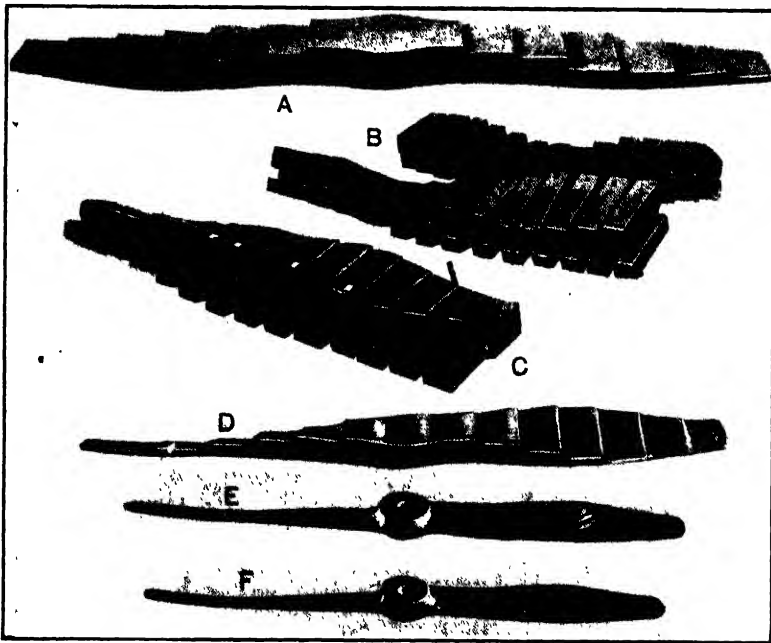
Outlining Steps in Constructing Wood Propellers by the De Grandeville System. Laminations before Bending Shown at A. B—Laminations Clamped for Bending. C—Bent Glued Blank with Clamps Partly Removed. D—Bent Blank before Shaping. E and F—Completed Propellers.
